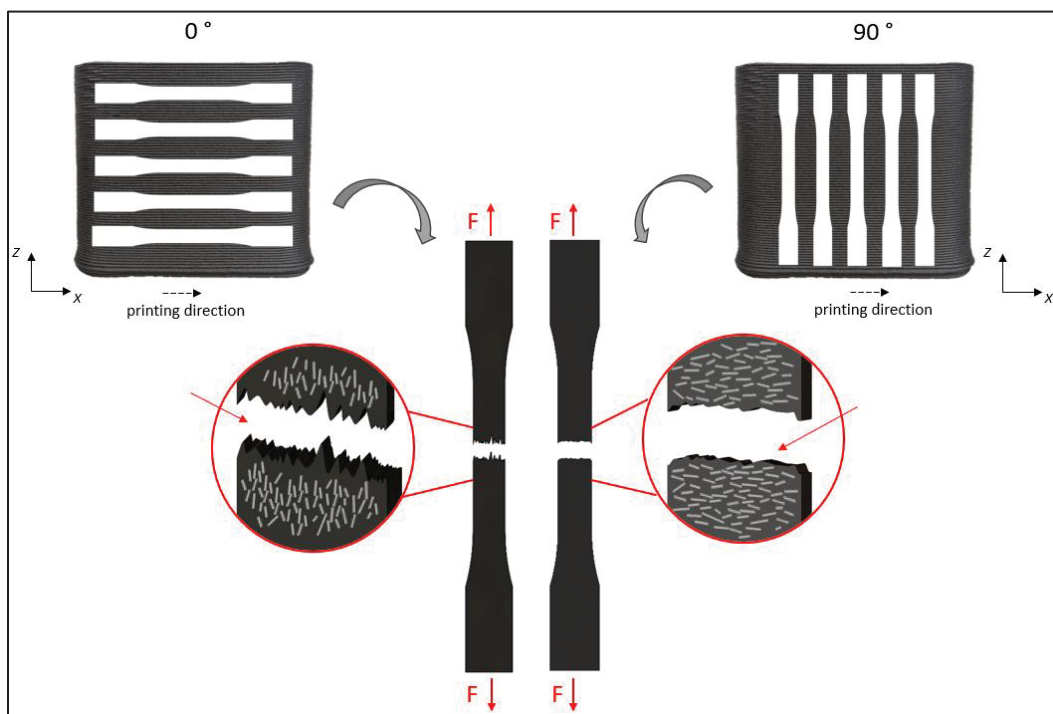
Schematic of the tensile 0° and 90° fracture surfaces observed by SEM
